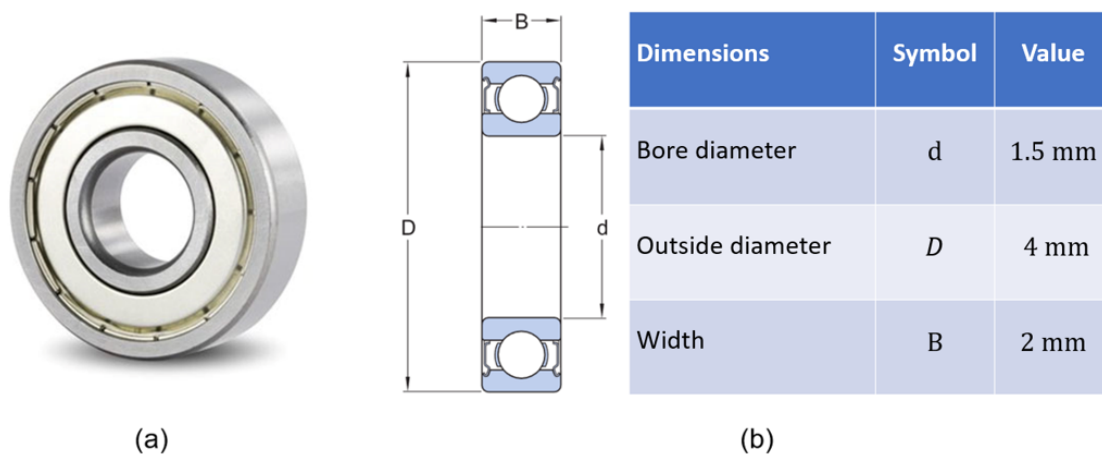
(a) Deep groove ball bearing 681-X-ZZ NBZ (b) Bearing dimensions [23].
